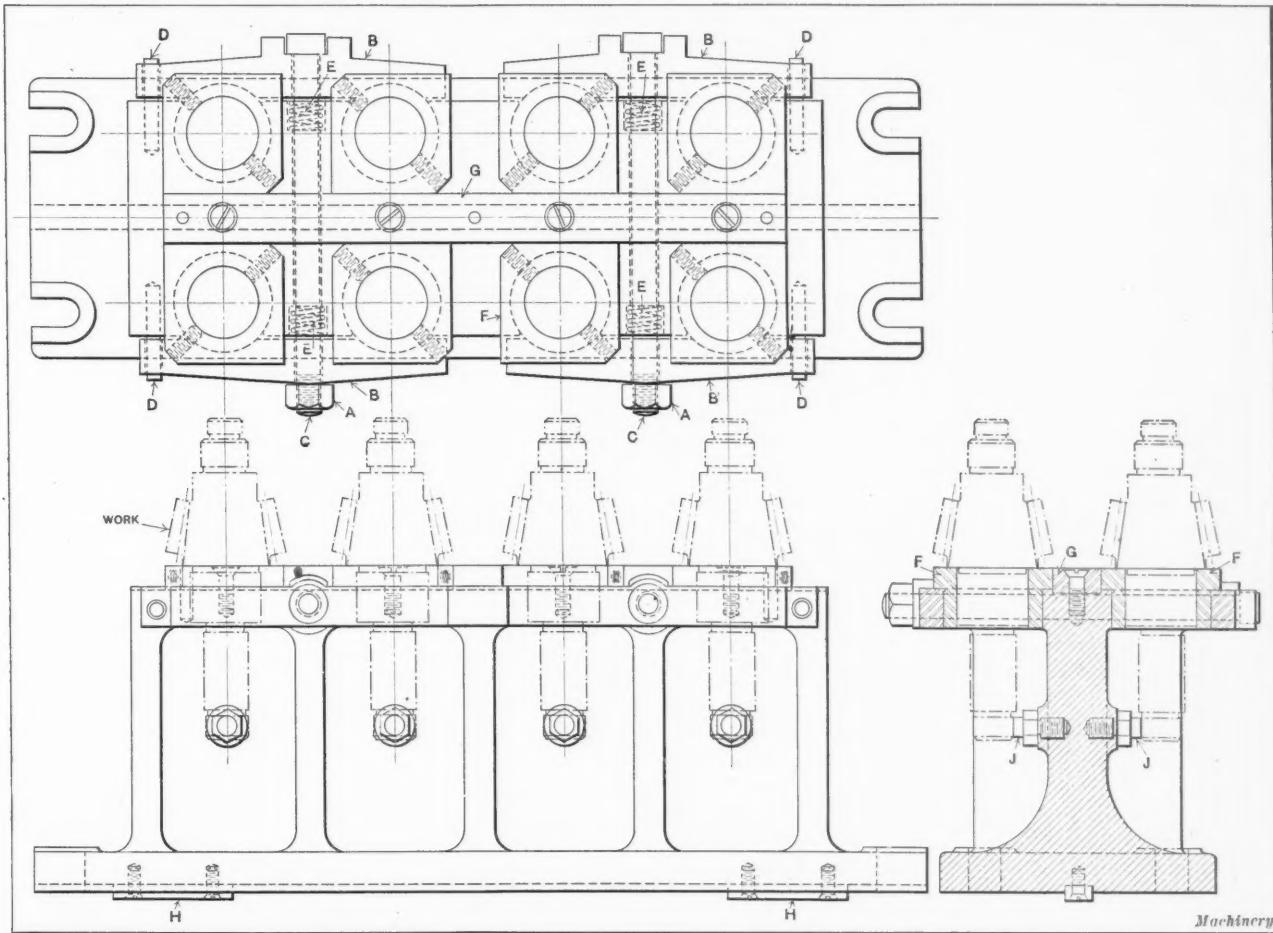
Details of Indexing Fixture for milling Square-stem Pinions
